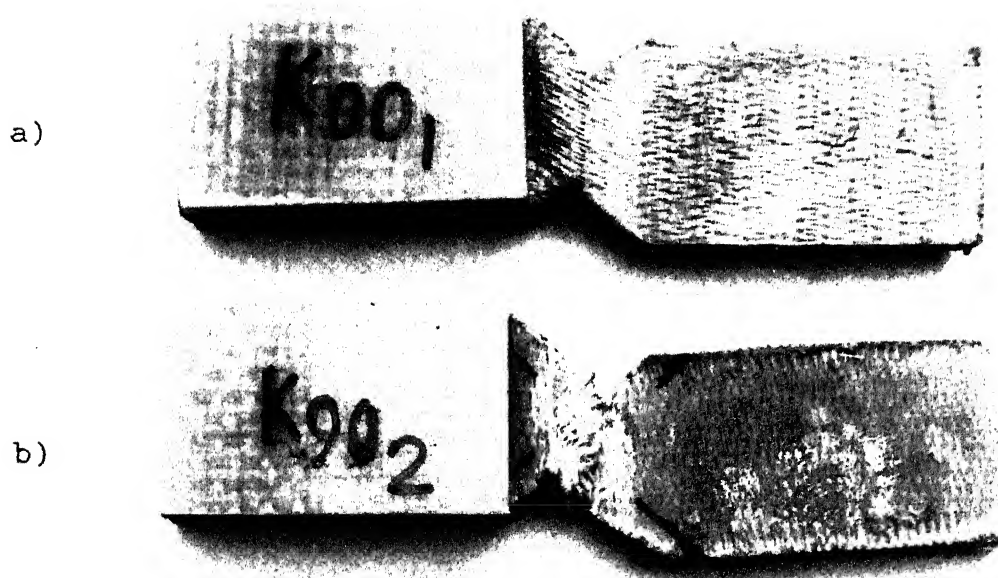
FRACTURED IOSIPESCU SPECIMENS OF
